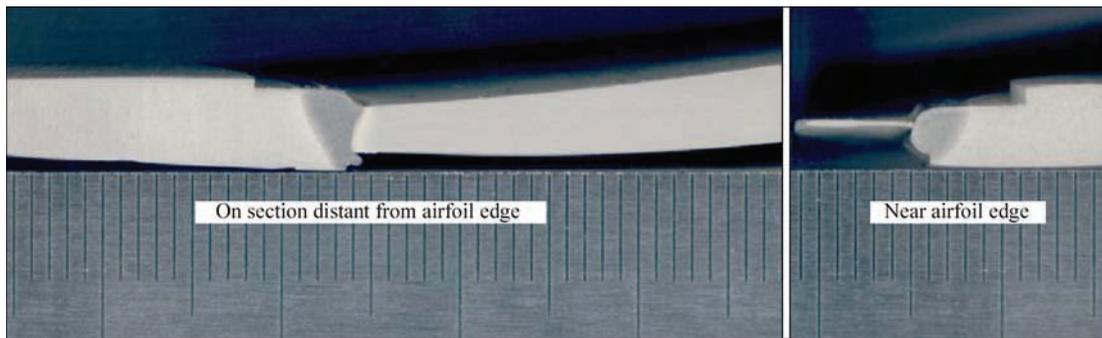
Macrosections of repair EBW-joint of «welded-in piece» and blade airfoil
